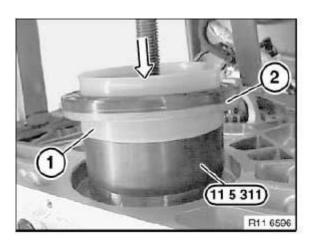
Identifying Special Tool (11 5 311) On Bolts Courtesy of BMW OF NORTH AMERICA, INC.
